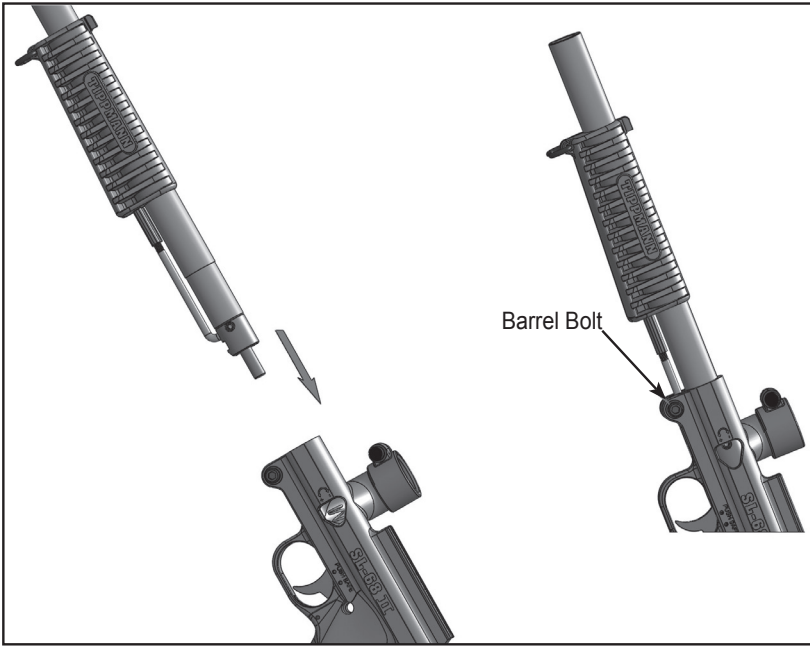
Insert Barrel Assembly into Marker Body; Tighten Barrel Bolt.
